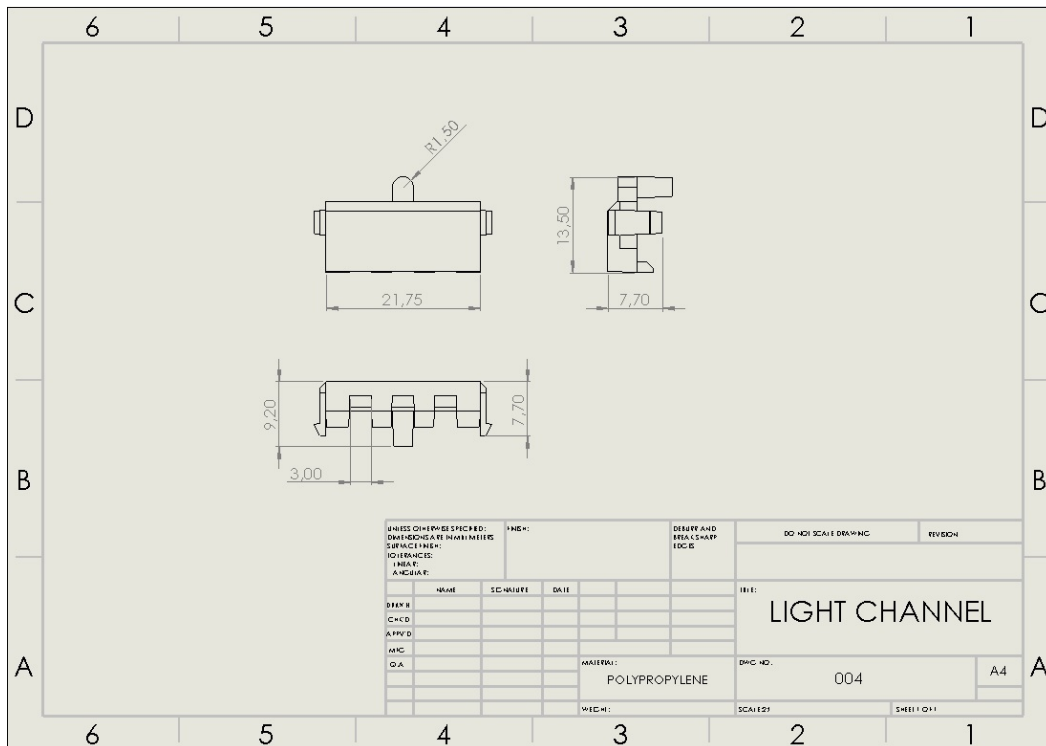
CAD draft showing the dimensions of part used in the industry application of the developed design rules
